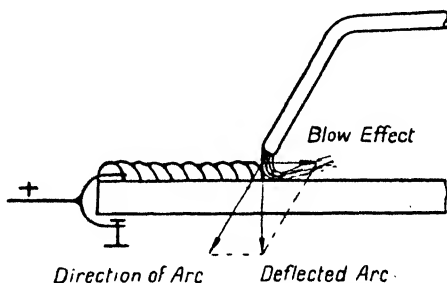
The way in which the electrode is held during arc welding
